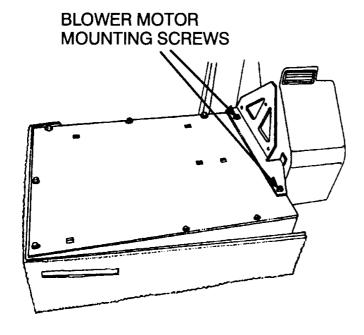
Blower Motor Mounting Screws (9800 Models Only)
